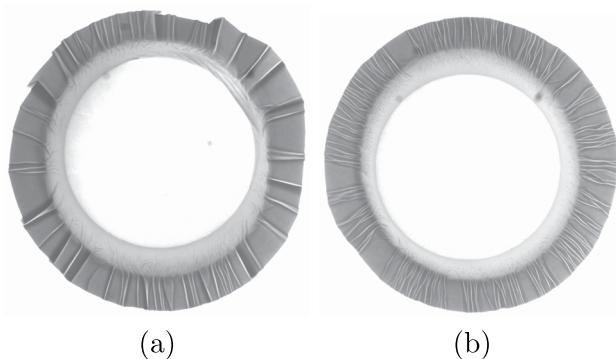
Top view on parts after deep drawing (a) Uneven surface due to few, large wrinkles (b) Even surface due to fine wrinkle distribution
